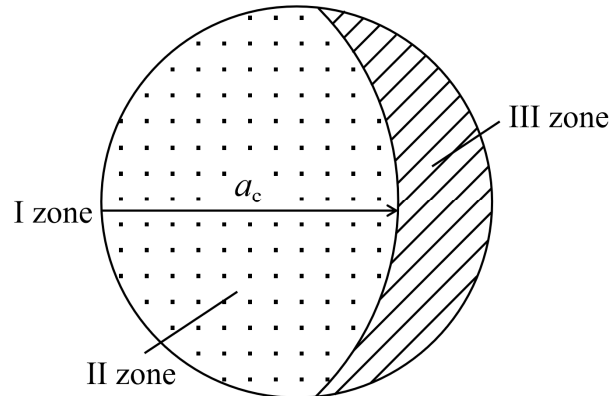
Illustration of the division of fatigue fracture zones and critical crack length a_c .
